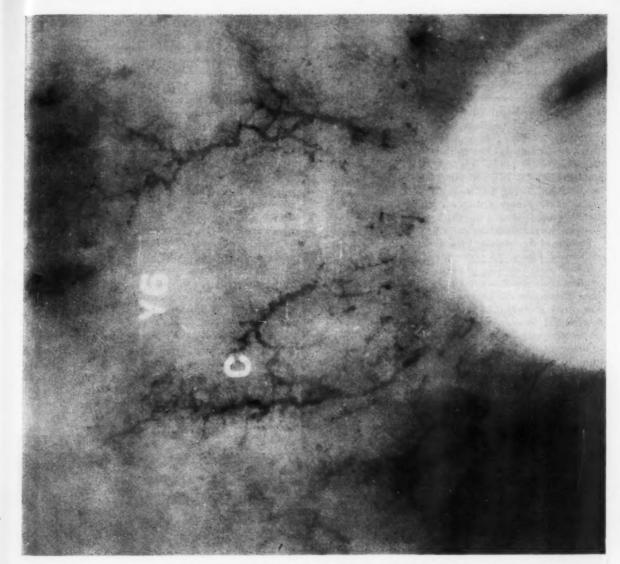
Radiograph of area adjacent to the riser of a 2-in.-thich circular casting 36 in. in diam fed with a riser 7½ in. in diam.
